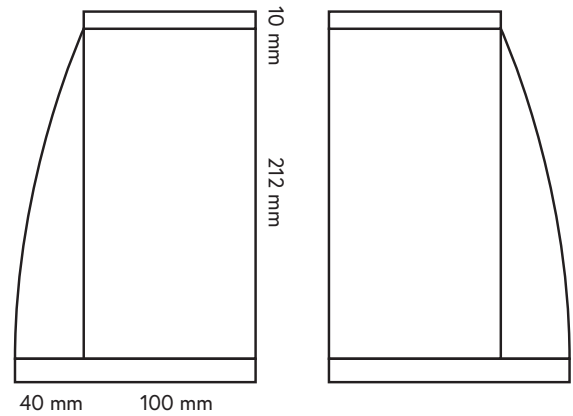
Cutout pattern that is used to create the cylindrical shape
